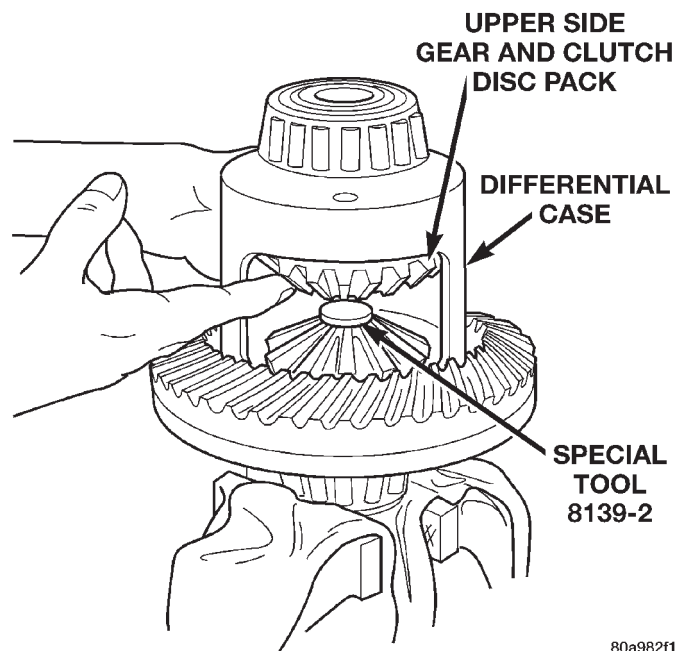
Upper Side Gear & Clutch Disc Pack Installation
